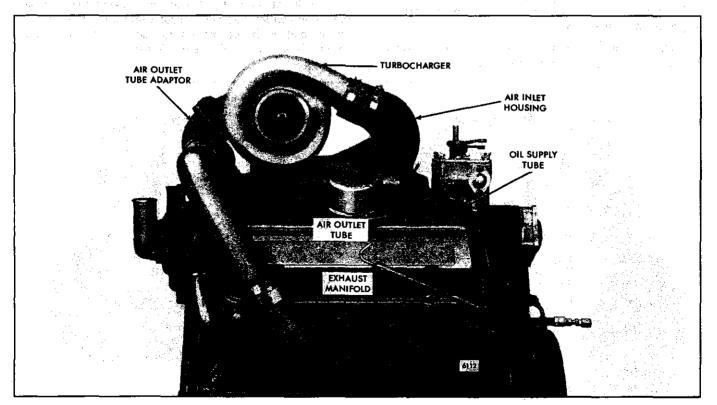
TV61 Turbocharger Mounting (6V Engine)
